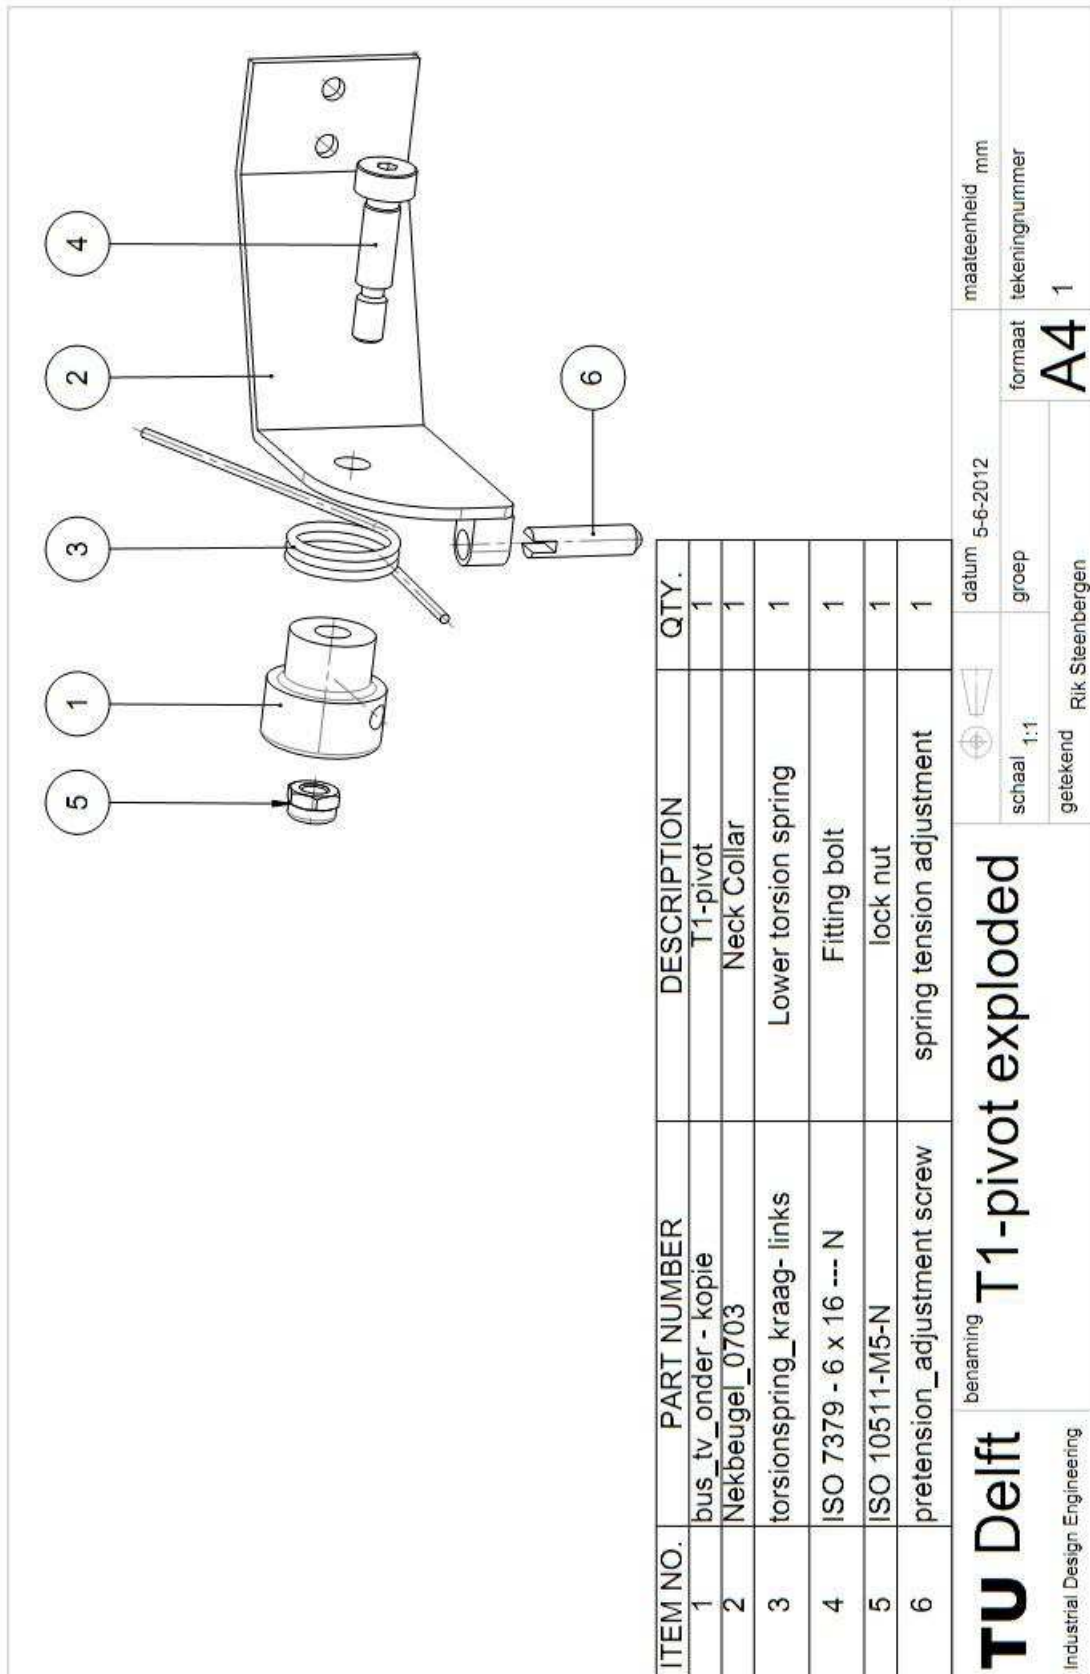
Exploded view of the lower pivot; T1. It has six components: neck collar, M6x16 fitting bolt (rotation axis), slotted pretension M5 screw, lower torsion spring, T1-pivot and a M6 locking nut.
